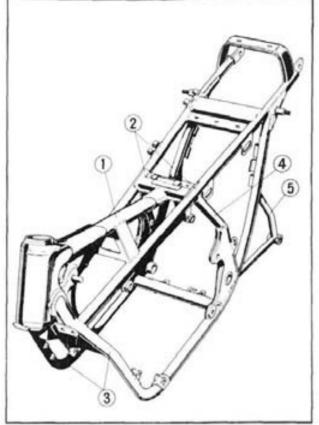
① Main pipe ② Sub tube ③ Under sub tube
